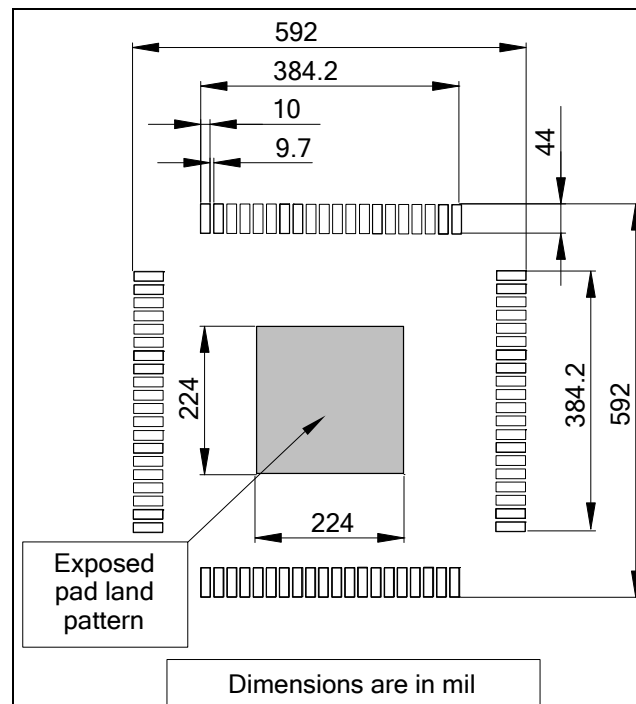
Recommended PCB Layout- Thermal Pad Footprint (CS)
